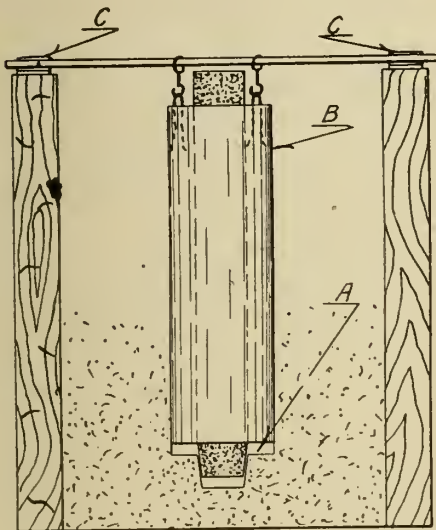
SLEEVE MOULDED ON END WITH STAPLES TO BE CAST IN.
